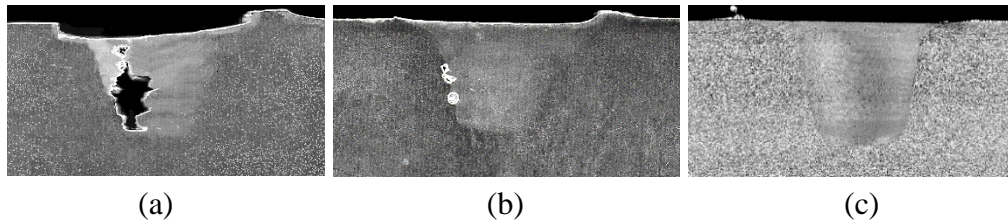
Macrographs of FSPed samples (a) and (b) by tool A01, (c) by Triflat.
